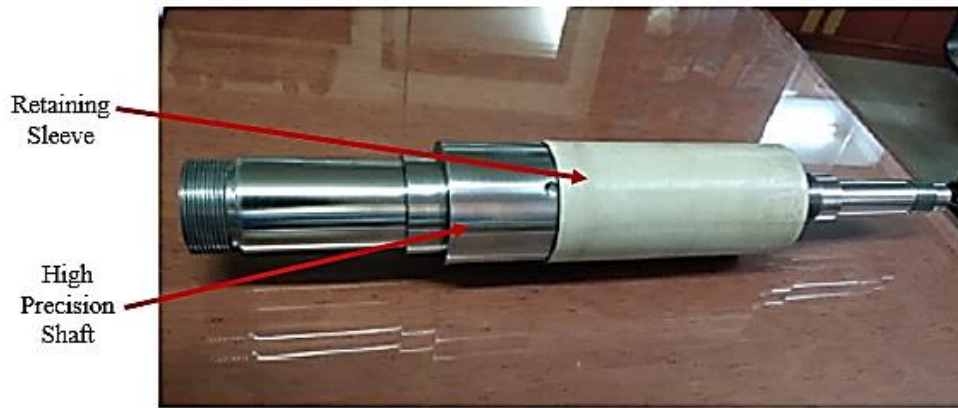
Rotor assembly with high precision shaft and retaining sleeve
